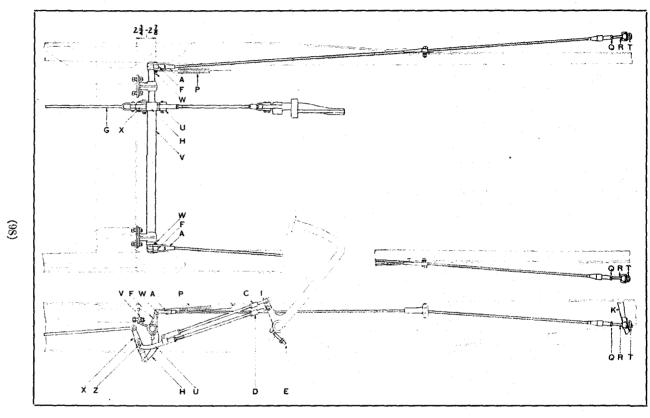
V-63 Foot Brake Cables to Front Wheel Brakes (Second Type)
